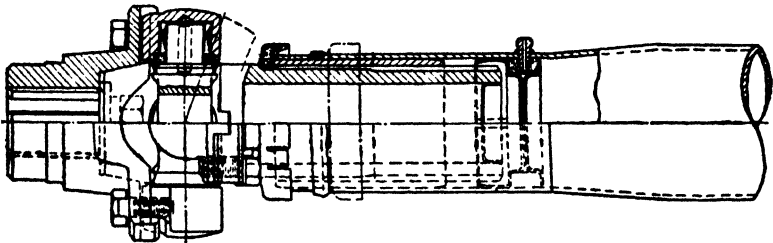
PROPELLER-SHAFT ASSEMBLY FOR HIGH-SPEED OPERATION.
